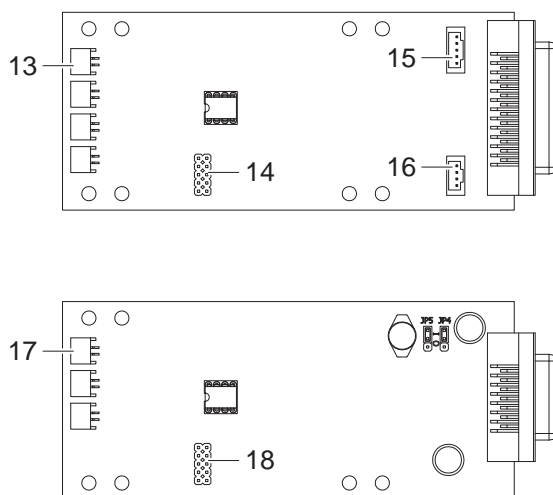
Replacing PCB I/O Interface and PCB USB Hub
